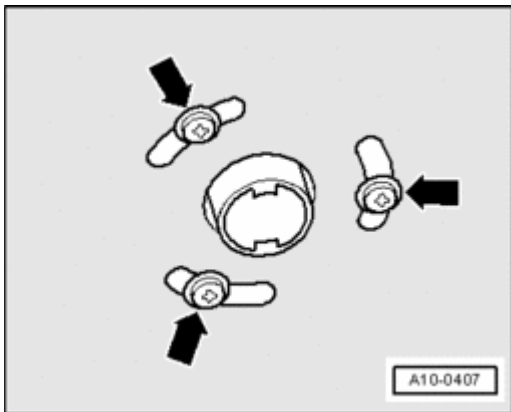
Removing Bolts For Exhaust Pipe Of Parking Heater/Auxiliary Heater On Noise Insulation
